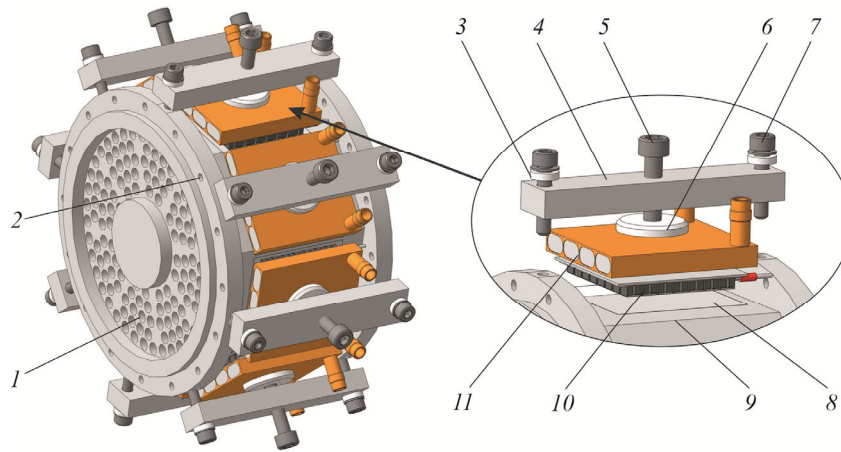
Design of the hot heat exchanger of thermoelectric generator: 1 – channels for passing hot gas; 2 – holes for fastening the sections of the hot heat exchanger to each other; 3 – fluoroplastic washers; 4 – clamping bar; 5 – clamping screw; 6 – clamping disc; 7 – screws for attaching the clamp to the heat exchanger; 8 – mica plate; 9 – the seat of thermoelectric module; 10 – thermoelectric module; 11 – cold heat exchanger
